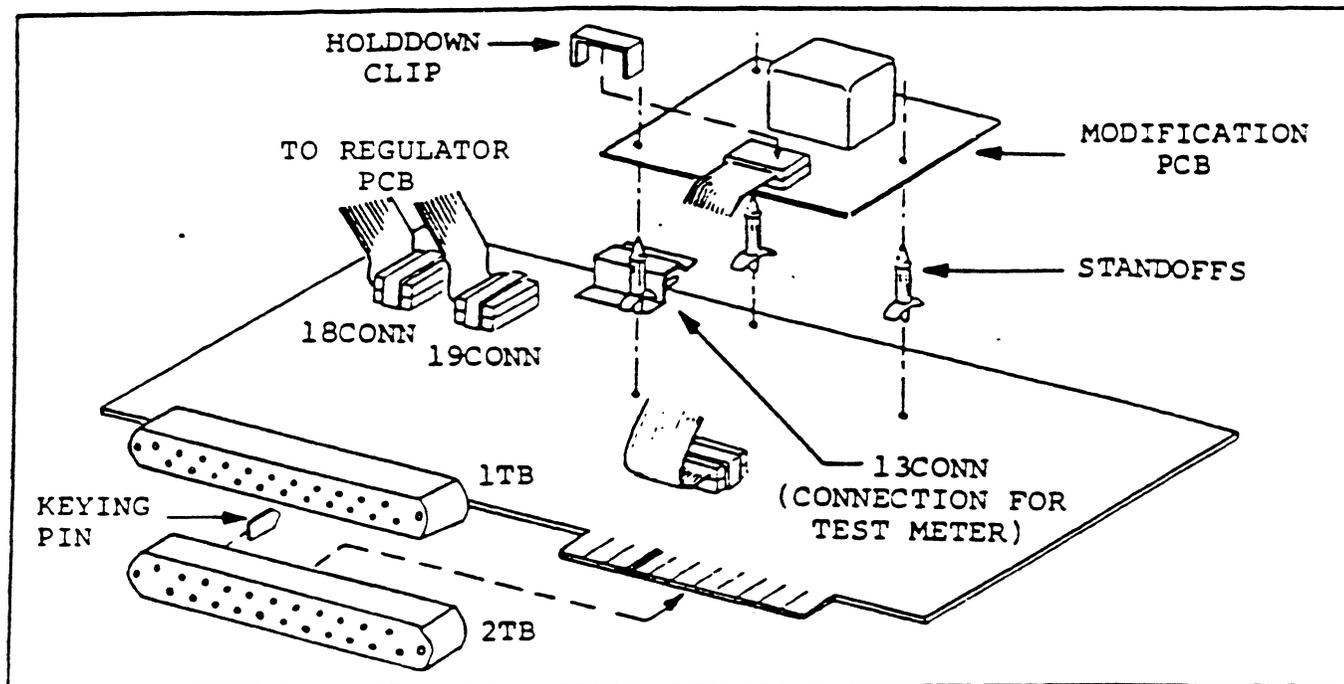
Mod Kit Installation on Relay/Interface PCB
